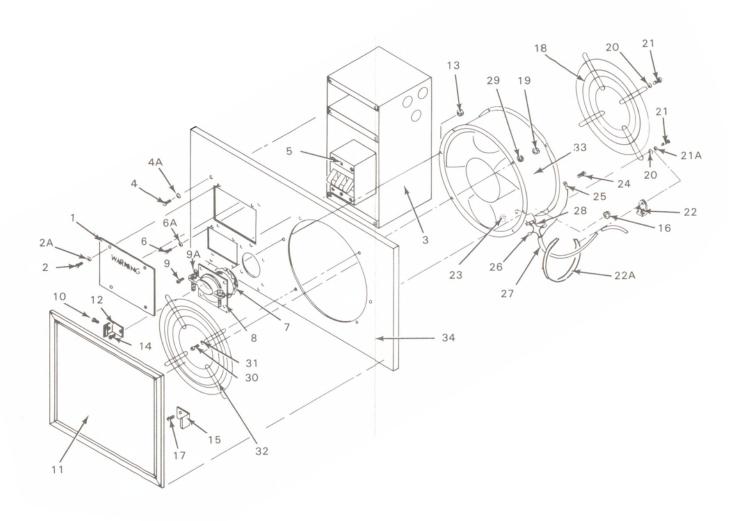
Exploded View Of Power Supply 4-15/4-16
